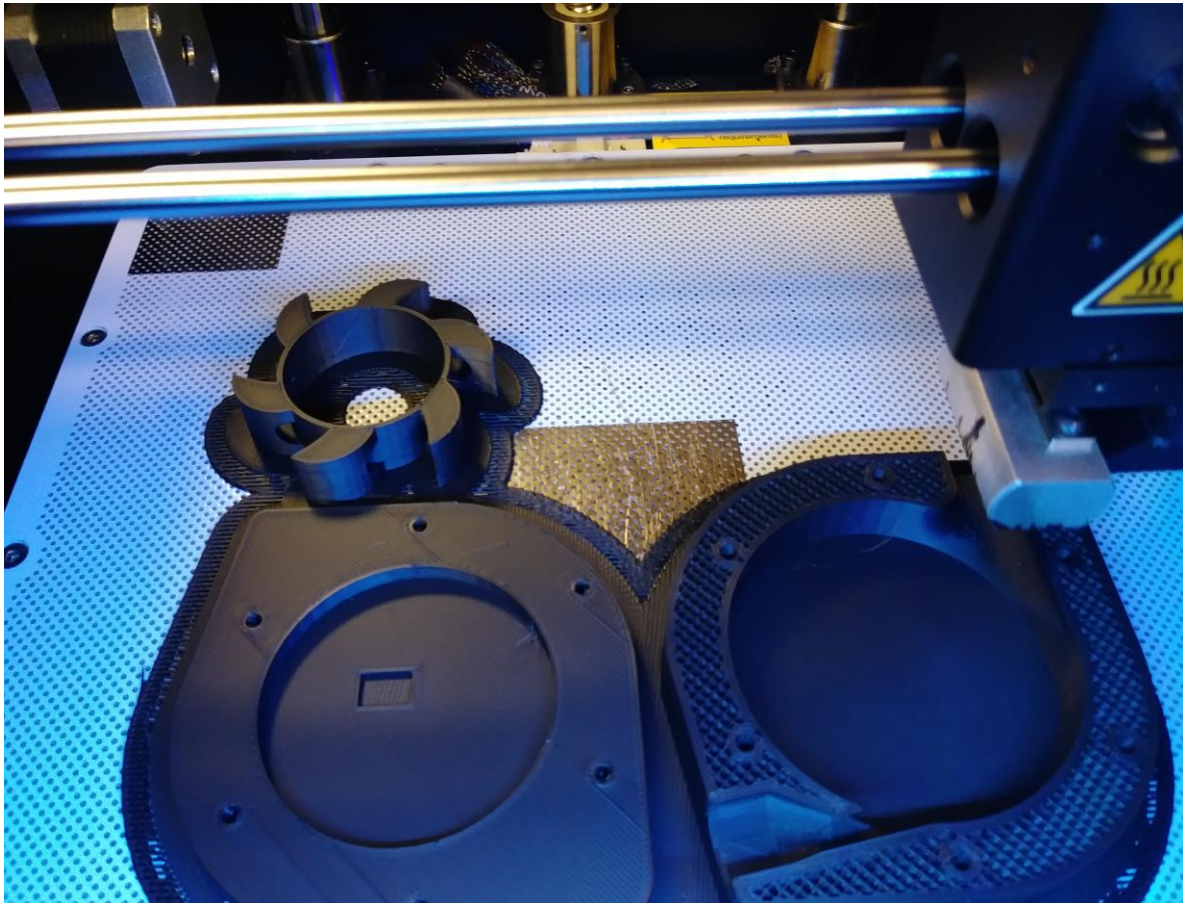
Zortrax printer in action, printing the LST blade assembly (top), lid (lower left) and casing (lower right).
